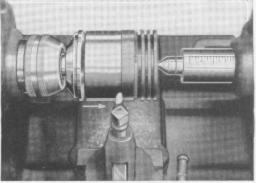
Rough Turning a Semi-Machined Piston, Feeding the Lathe Tool from Left to Right
